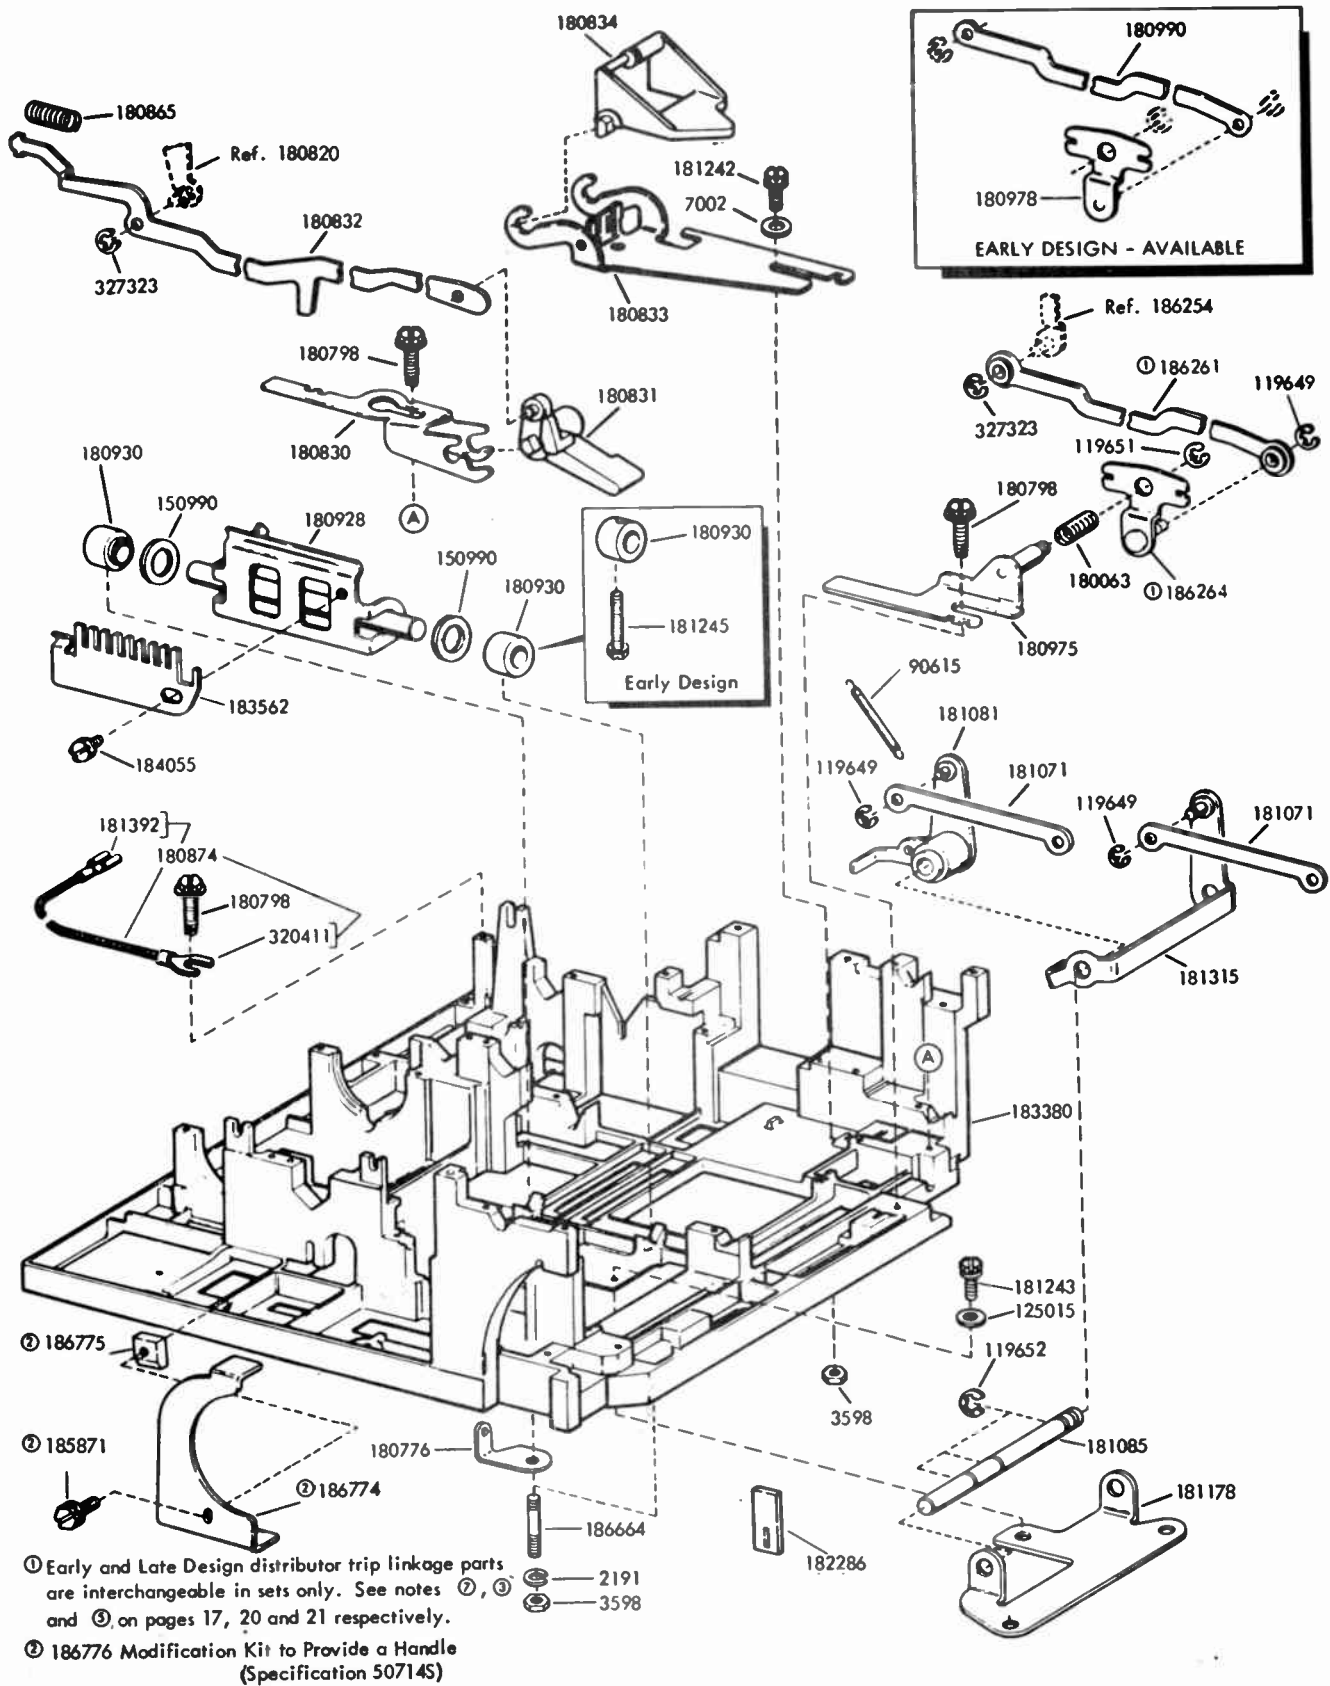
MOTOR CONTACT - SPROCKET FEED
